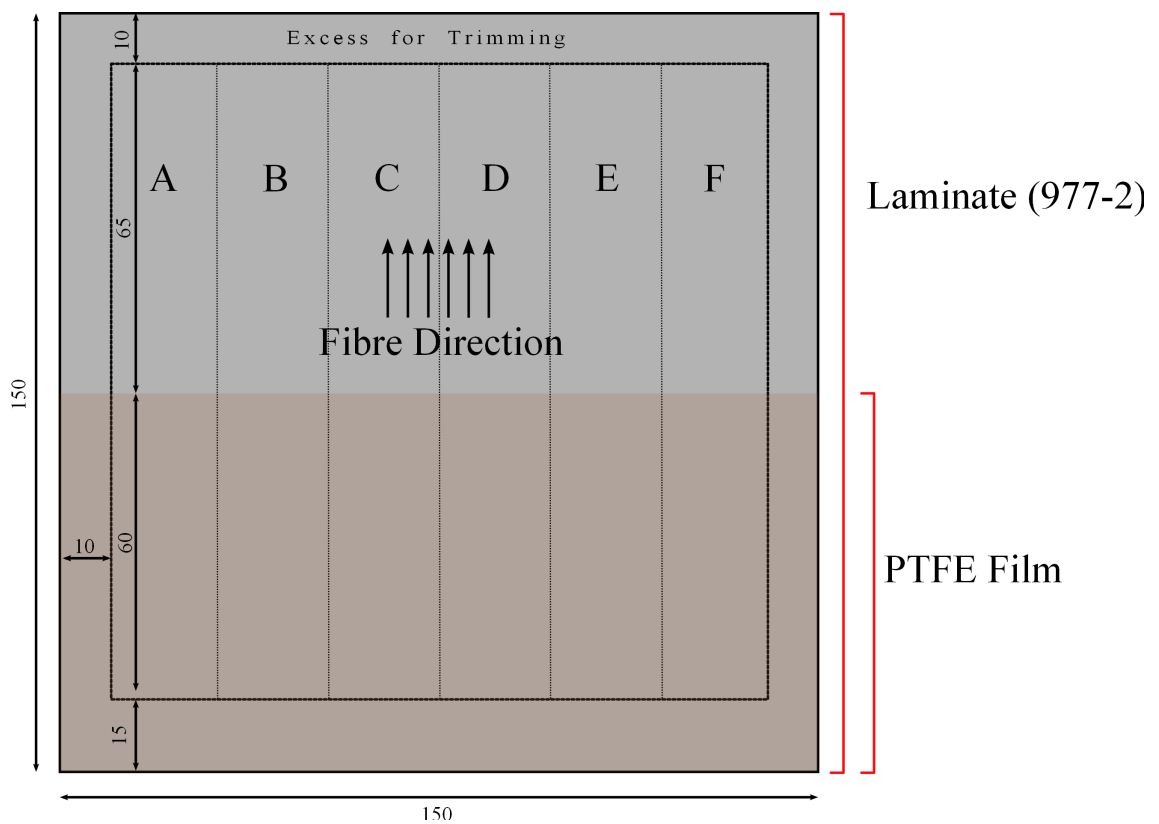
DCB specimen position on each laminate panel with dimensions in mm. All specimens are 20 mm wide incorporating a margin for the material removed by the saw.
